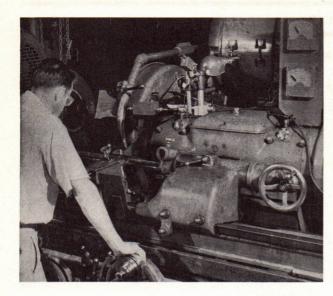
Regrinding a carbide Sendzimir mill work roll with 1500 grit diamond wheel. Instrument at lower right is wheel load ammeter
